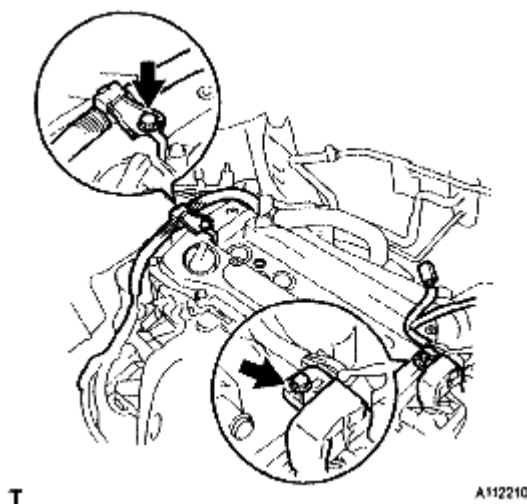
Locating Engine Wire Harness Brackets And Bolts
